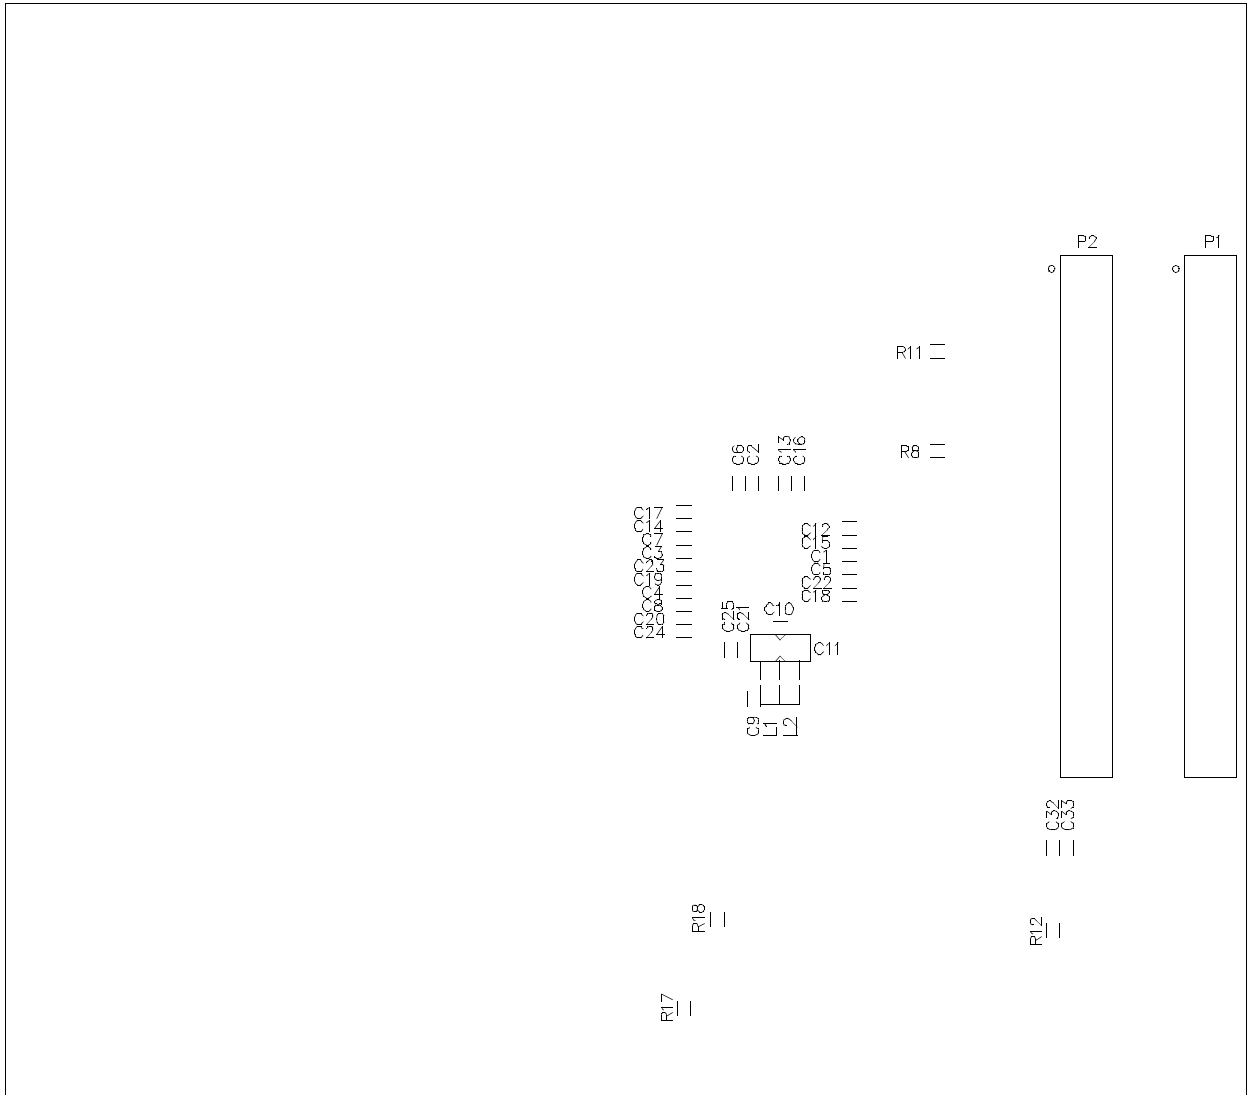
S5U13742P00C100 Board Layout - Bottom View
